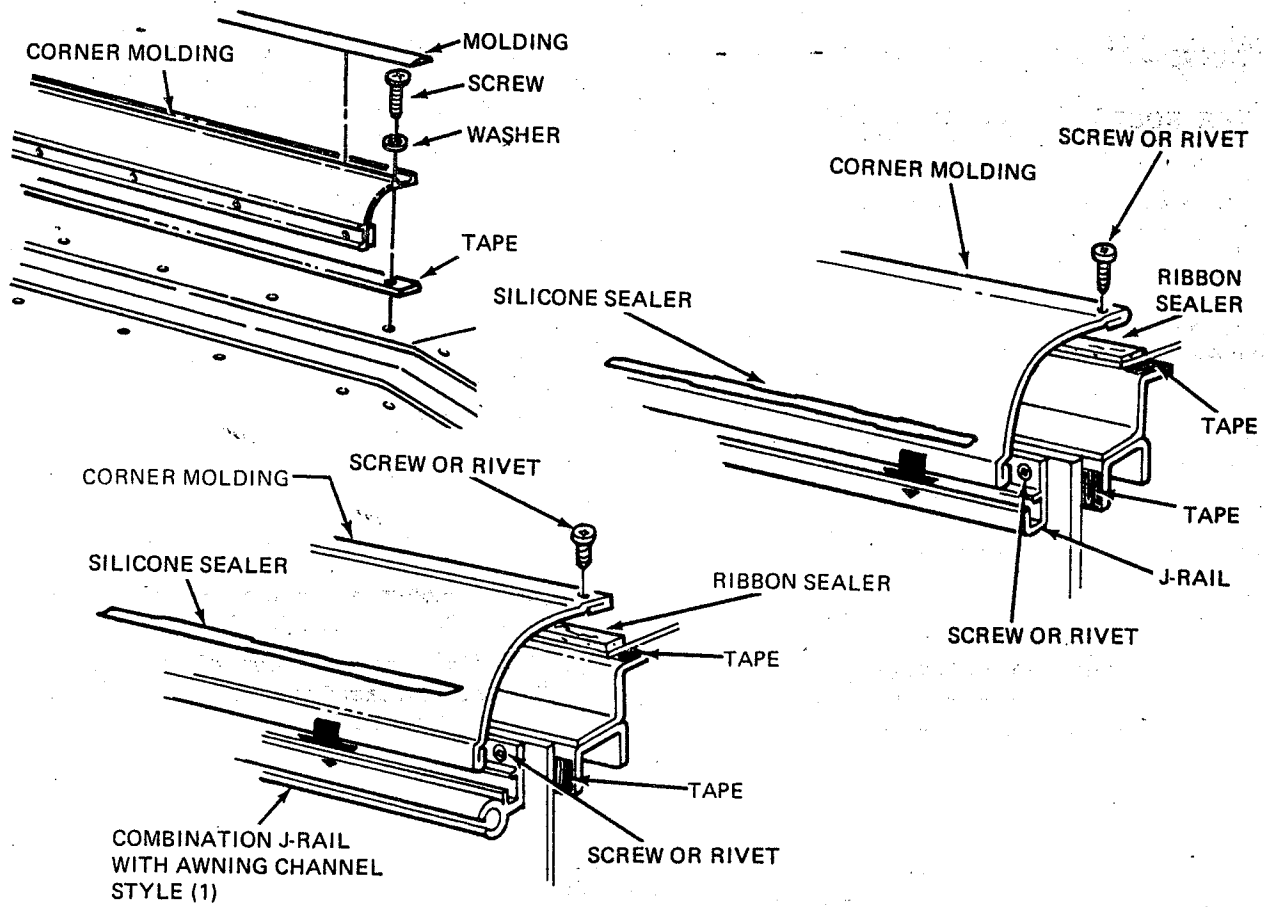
Cross section of moldings fastening to J-rail (all models)
